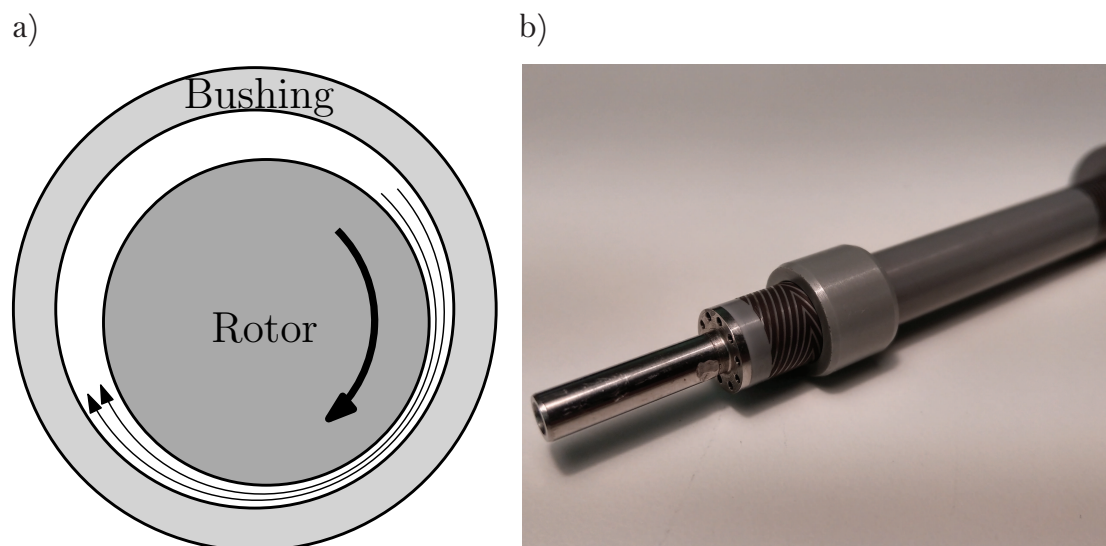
a) Working principle of a fluid film bearing; b) Herringbone-Grooved rotor and bearing bushing
